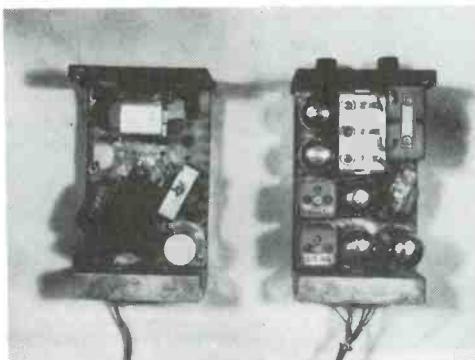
Top view of the parts mounted on the BC-1206 and power supply.
